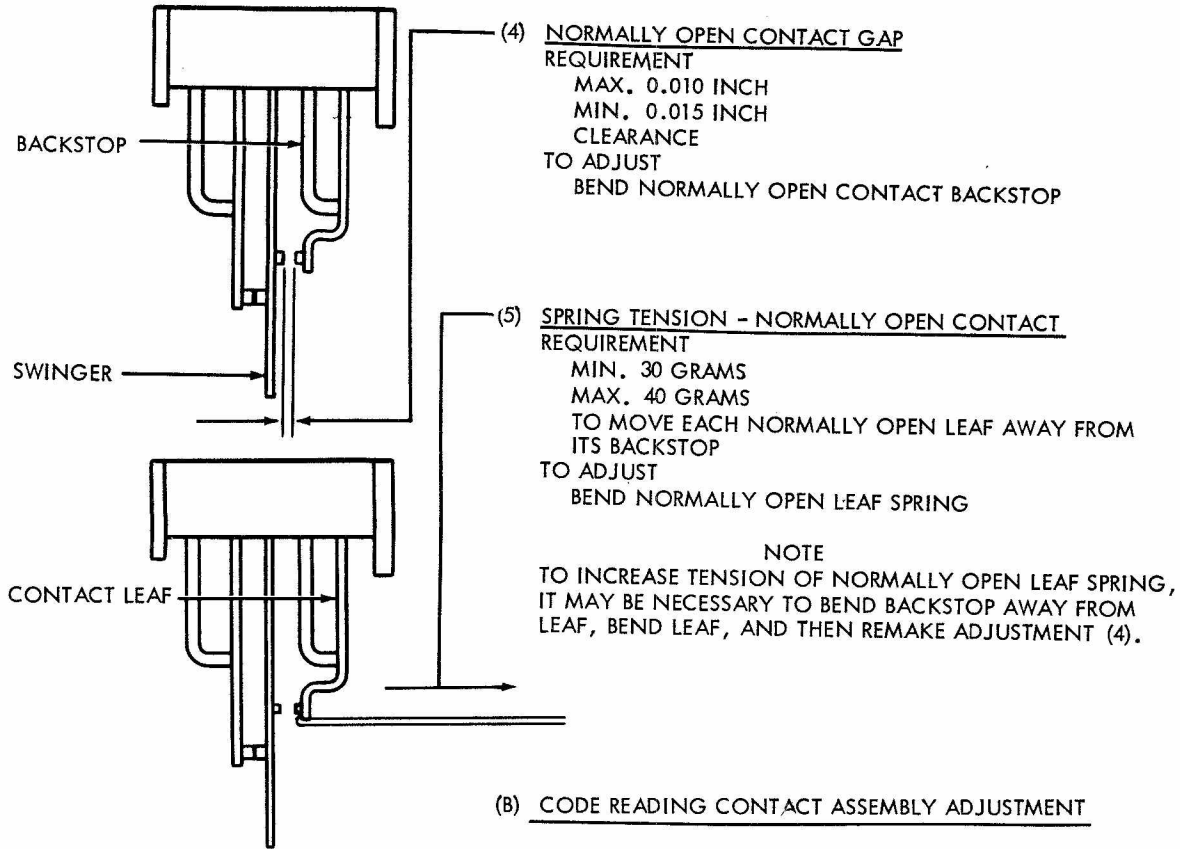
Tandem Message Identification Module, Code Reading Contact Assembly
